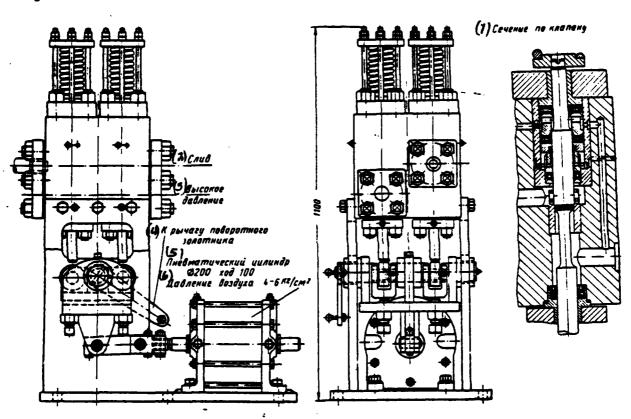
Distributor with the pneumatic cylinder for valve lift.
